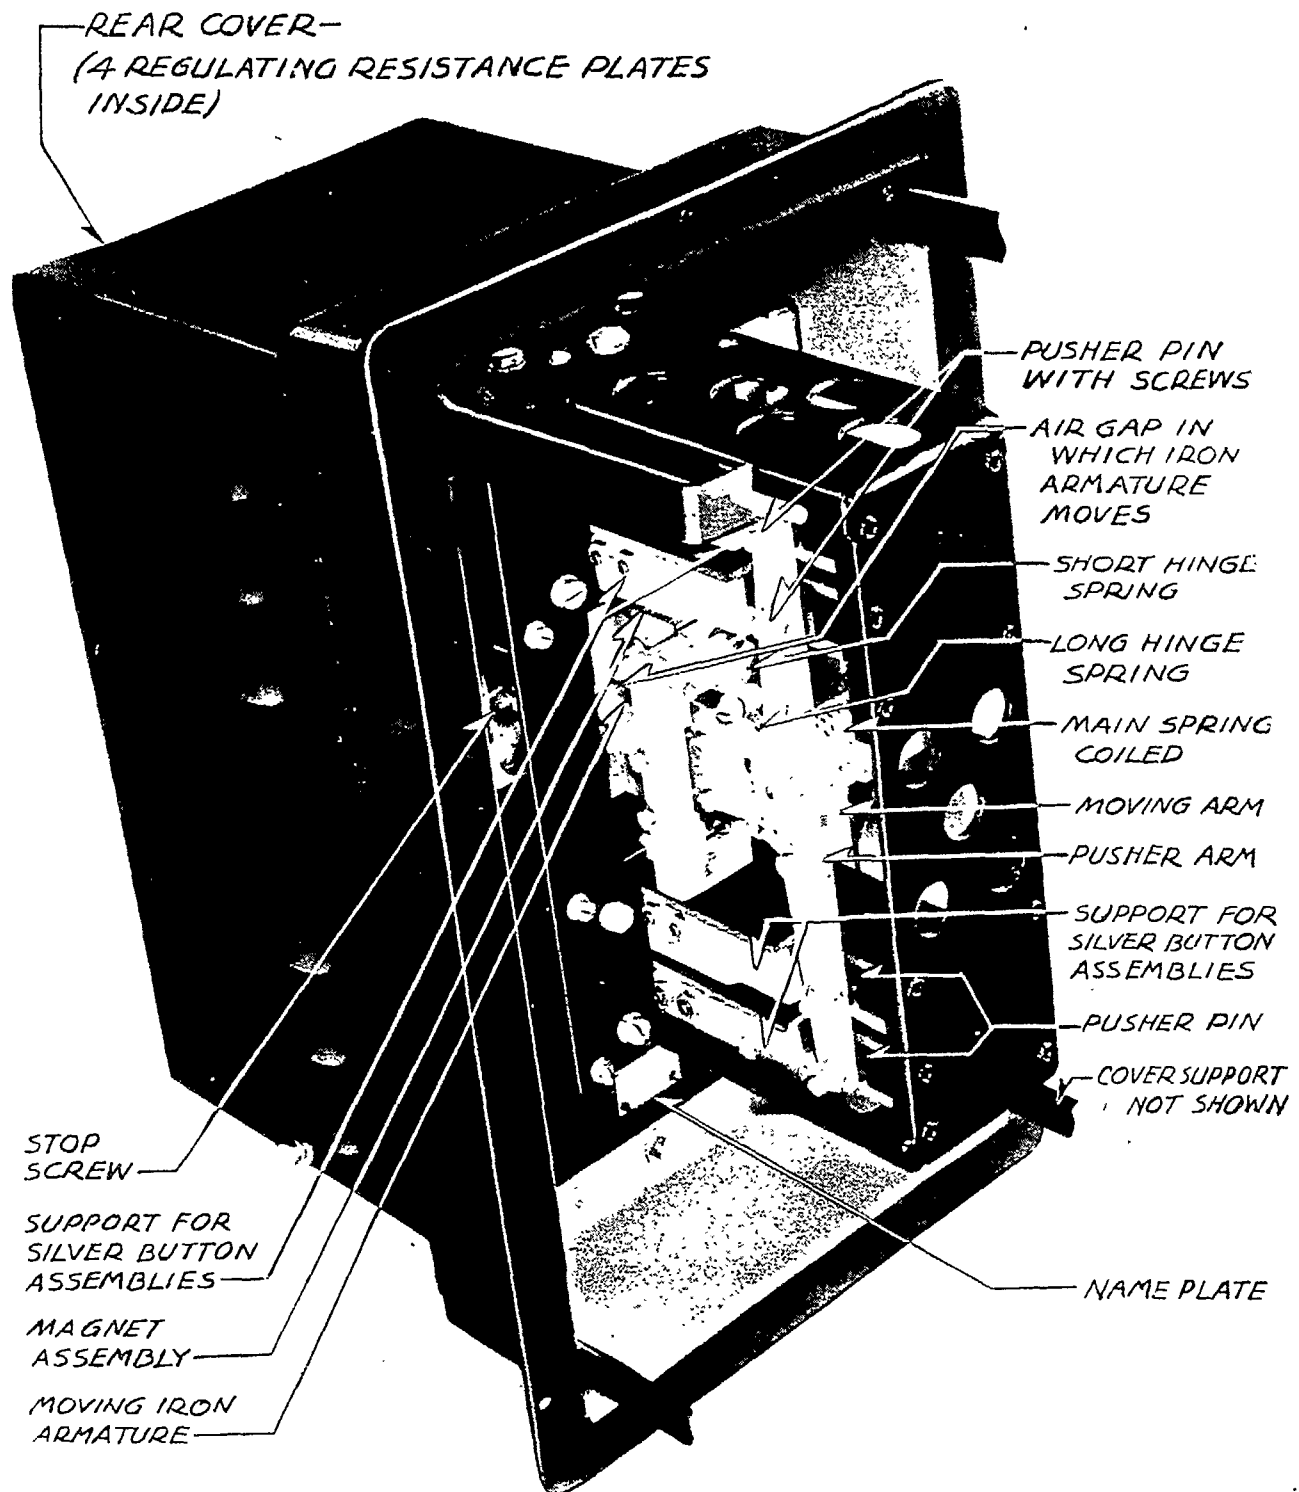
Westinghouse Type "SRAN-4" SILVERSTAT Voltage Regulator
